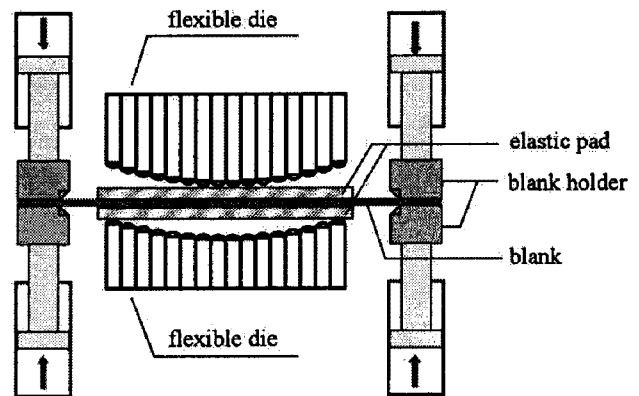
Constitution of flexible forming process for sheet metal using blank holders
